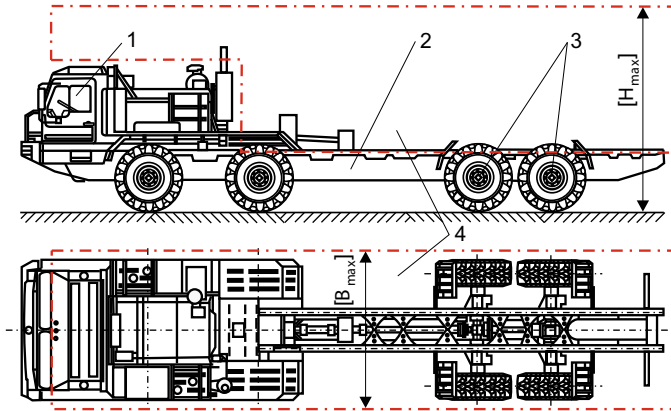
General view of a 4-axle wheeled chassis with an open load-bearing frame (1—driver’s cab, 2—load-bearing frame, 3—wheel axle, 4—area of possible placement of the main technological equipment of the mobile ropeway)
